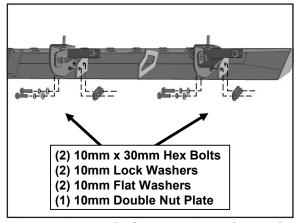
Attach passenger/right rear Mounting Bracket to threaded hole and Support Bracket.
